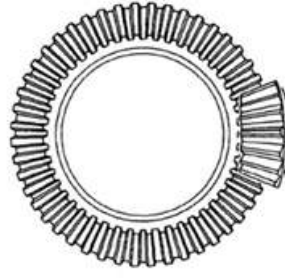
Straight-tooth bevel gear pair. Source: [63].
